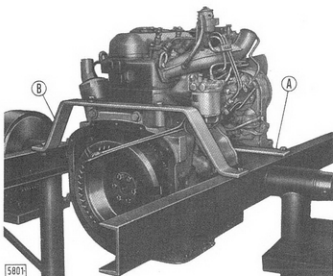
The Engine in position on Rotary Stand Part No. 290090
